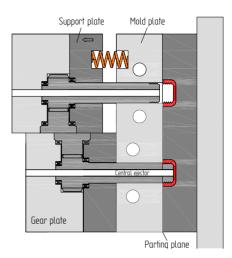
Principle of unscrewing the stripper plate with spring force
